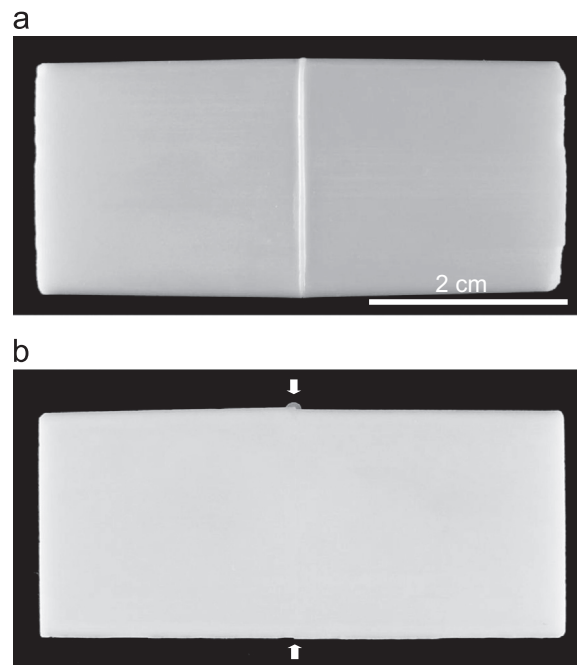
Photographs showing the (a) as-sintered outer surface and (b) inner cut face of the Al_2O_3 bars.
